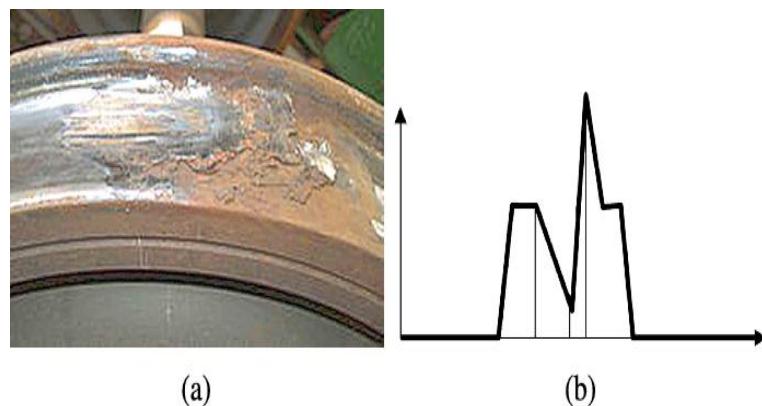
flat spot on train wheel of SBB(a) and wheel load measurement(b)
